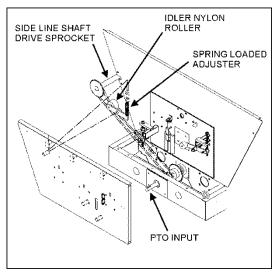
SIDE SHAFT CHAIN DRIVE
